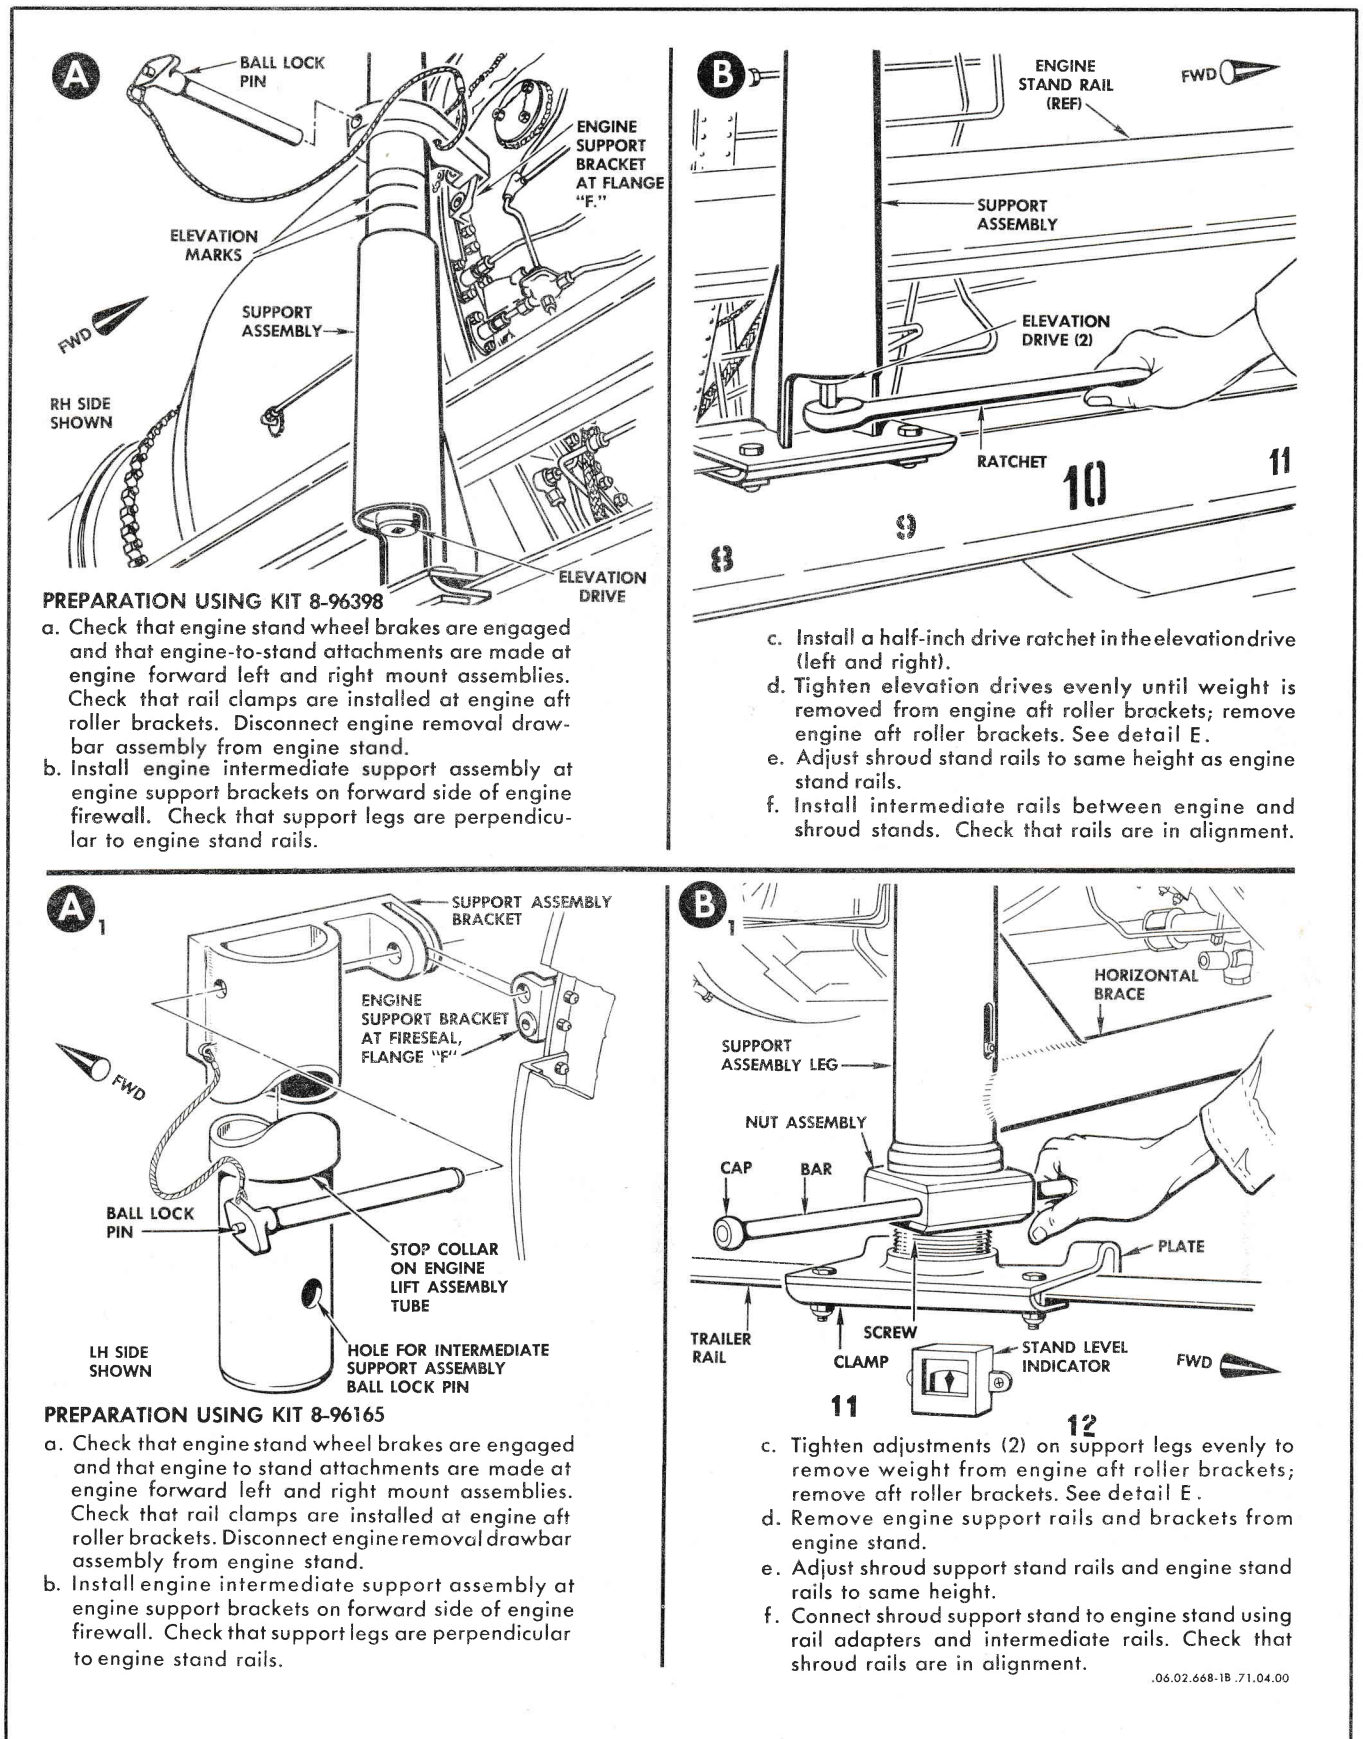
Replacement, Engine Shroud Using Stand USAF ETU-8/E (Sheet 1 of 4)
